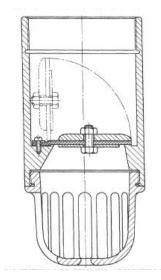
TYPICAL SECTIONAL DRAWING FOR A BORE WELL FOOT-VALVE
